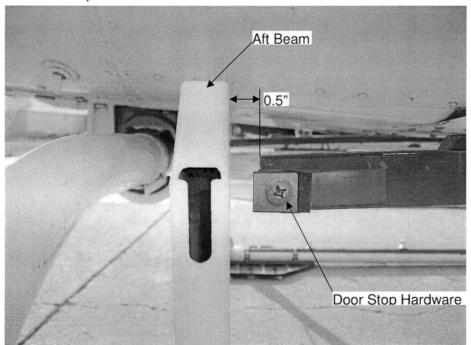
Completed Modification (Low Mounted Quick Release Beam shown)
